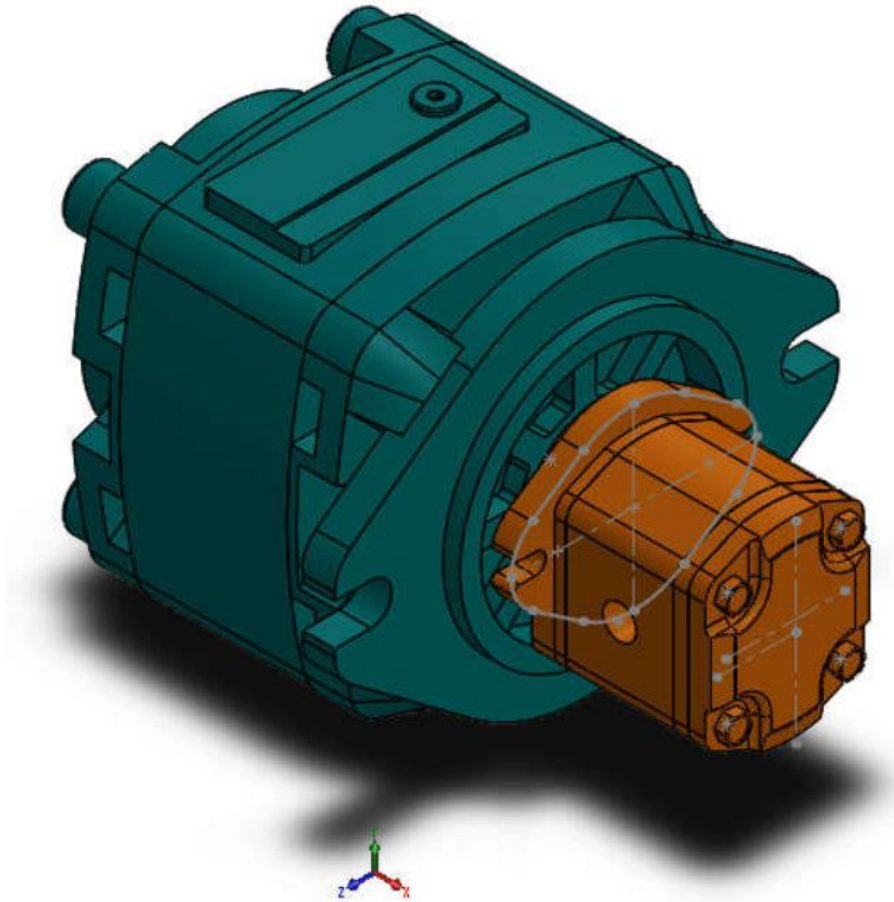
Solidworks model snap view of Pump motor with hydraulic pump
